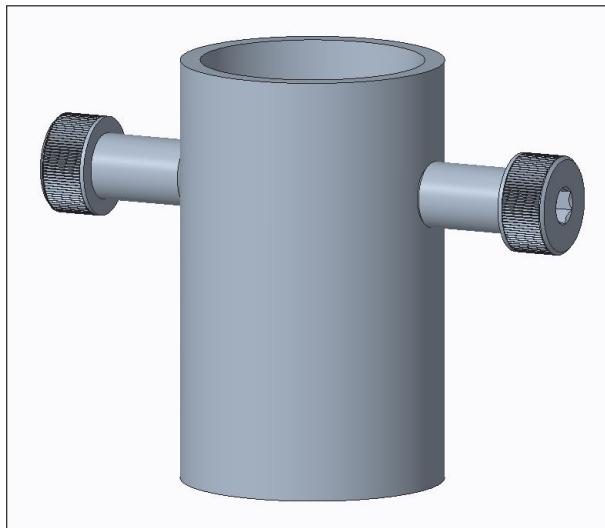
Motor Enclosure and bolts for the Soil Collection Assembly
